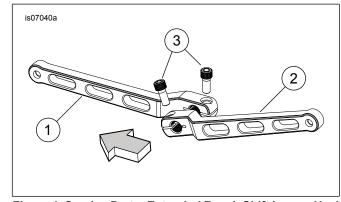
Service Parts: Extended Reach Shift Lever - Heel and Toe
